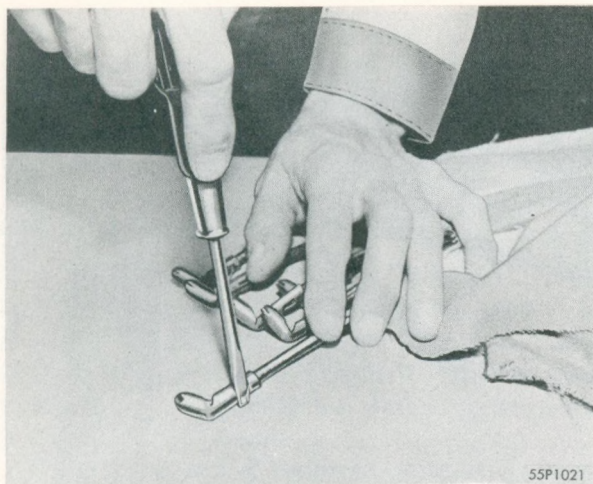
Bending Locking Tab to Remove Clip from Bow
